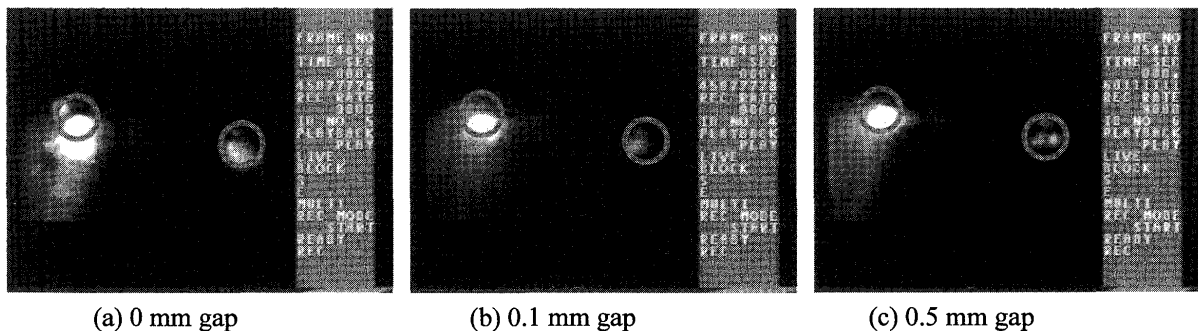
Observed photos of molten pool (left) and reflected beam (right) during YAG laser lap welding of Zn-coated steel sheets with gaps of 0 mm, 0.1 mm and 0.5 mm.
